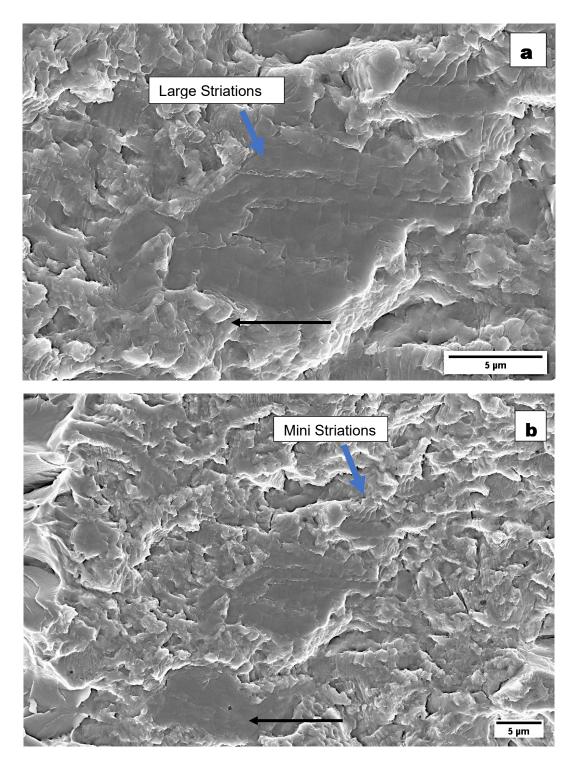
Fracture surface analysis of samples tested under UL+10%OL+MC in air. Large striations as well as mini-striations were observed on the fracture surface. Black arrows show cracking direction. [21]
